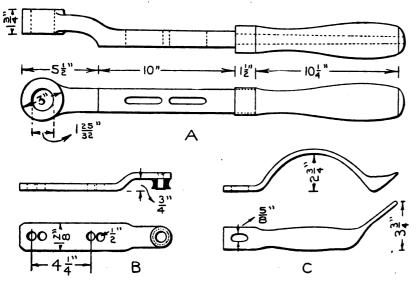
DETAIL VIEWS OF HANDLE, BENDER AND GAUGE OF TOOL FOR BENDING EYES.
